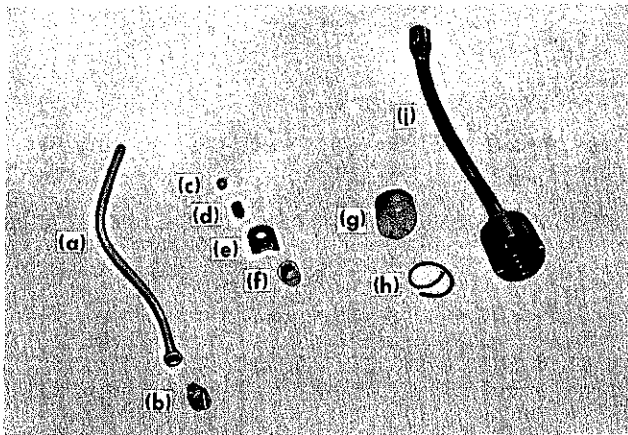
Fuel tank and chain oiler discharge valve parts removed for service include (a) fuel tube, (b) orifice assembly, (c) ball, (d) spring, (e) retainer, (f) lockwasher and screw, (g) fuel filter, (h) filter retainer, (j) fuel pick-up assembly. Parts a, b, c, d, e, f are removed from bar mounting pad; parts g, h, and j from fuel tank.
